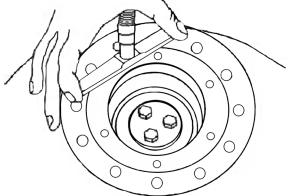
Check the Clearance Between the Gaterotor and Shelf
